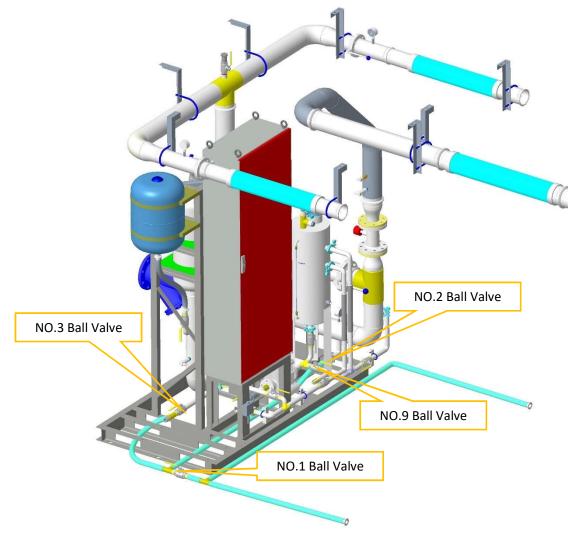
Filling/discharging valve for the pump station inside the container b) Connect the drain hose to No. 2 ball valve and No. 3 ball valve, tighten with a hose clamp; Lead the hose out of the unit and open No. 1-3 ball valve and No. 9 ball valve to drain the system.
